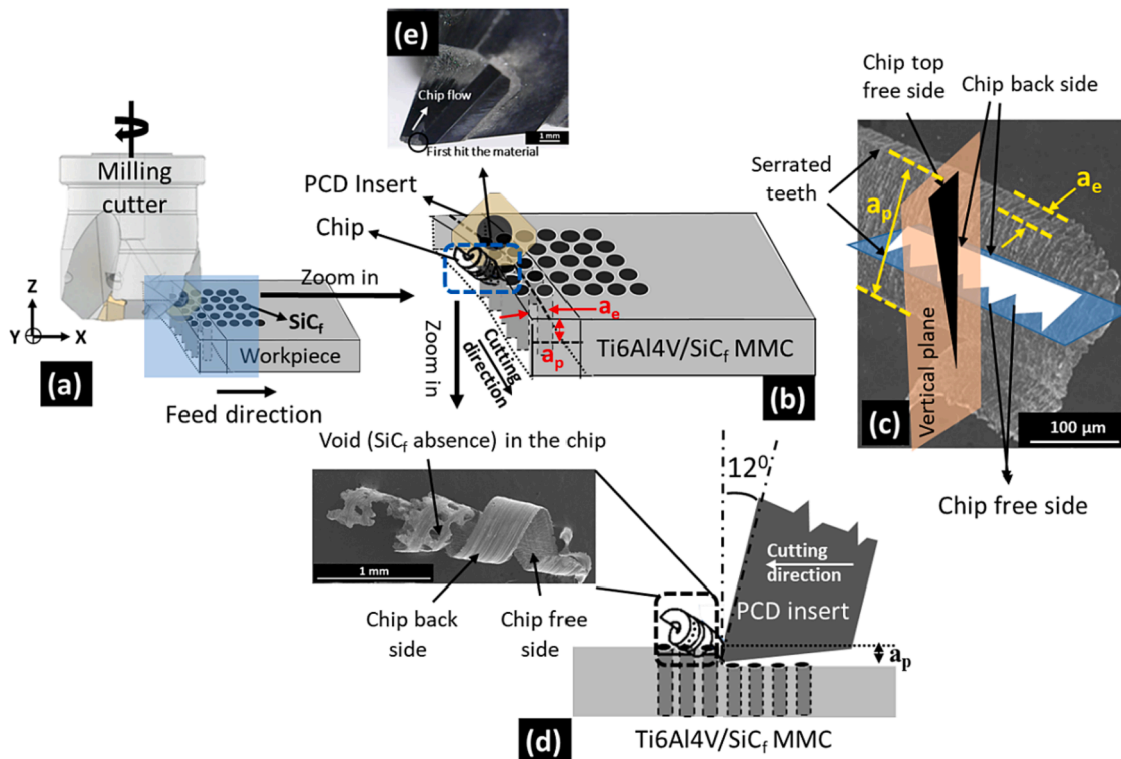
Schematically illustrates chip formation and flow during conventional milling of a Ti6Al4V/SiC<sub>f</sub> MMC: (a) shows the overall tool-workpiece engagement, (b) presents an enlarged view of a single cutting insert milling the composite, highlighting the underlying chip generation mechanisms, (c) depicts the key features of a cross-sectioned chip obtained from milling the MMC, including the serrated top free-side and smoother back side, (d) shows modelled chip formation in the SiC reinforced region, where the positive rake angle induces upcurling of the discontinuous chips and (e) portrays the rake face of the cutting tool containing a chip breaker element.
